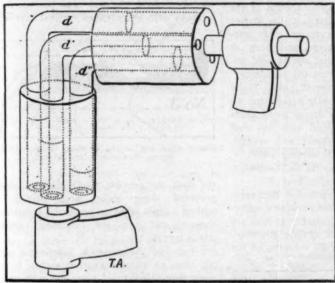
The Brun jointless mechanical movement for transforming gas pres sure into rotary motion
